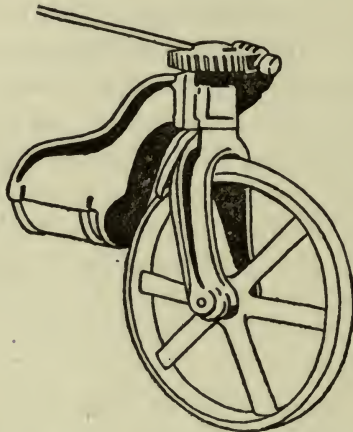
THE STEERING GEAR MECHANISM FOR A SINGLE FRONT WHEEL
